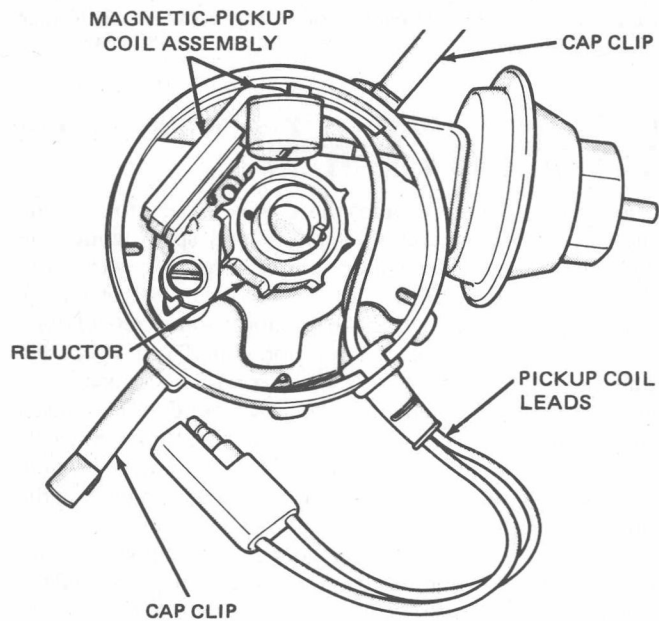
Electronic ignition distributor. (Chrysler Corporation)
